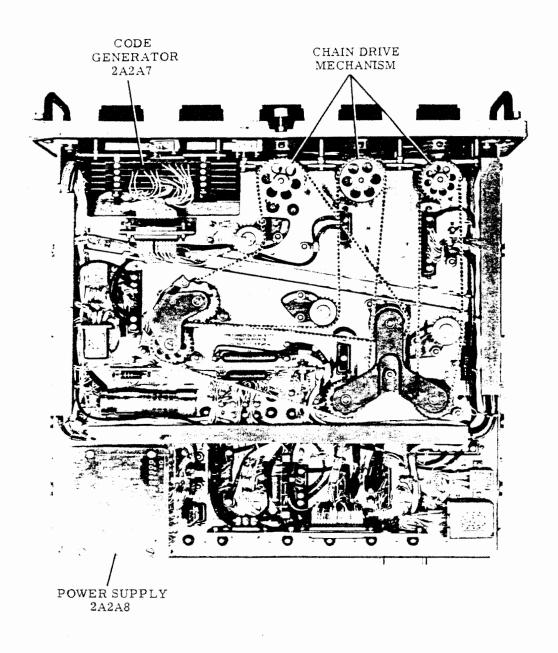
Radio Transmitter T-827/URT, Bottom View, Case Removed
